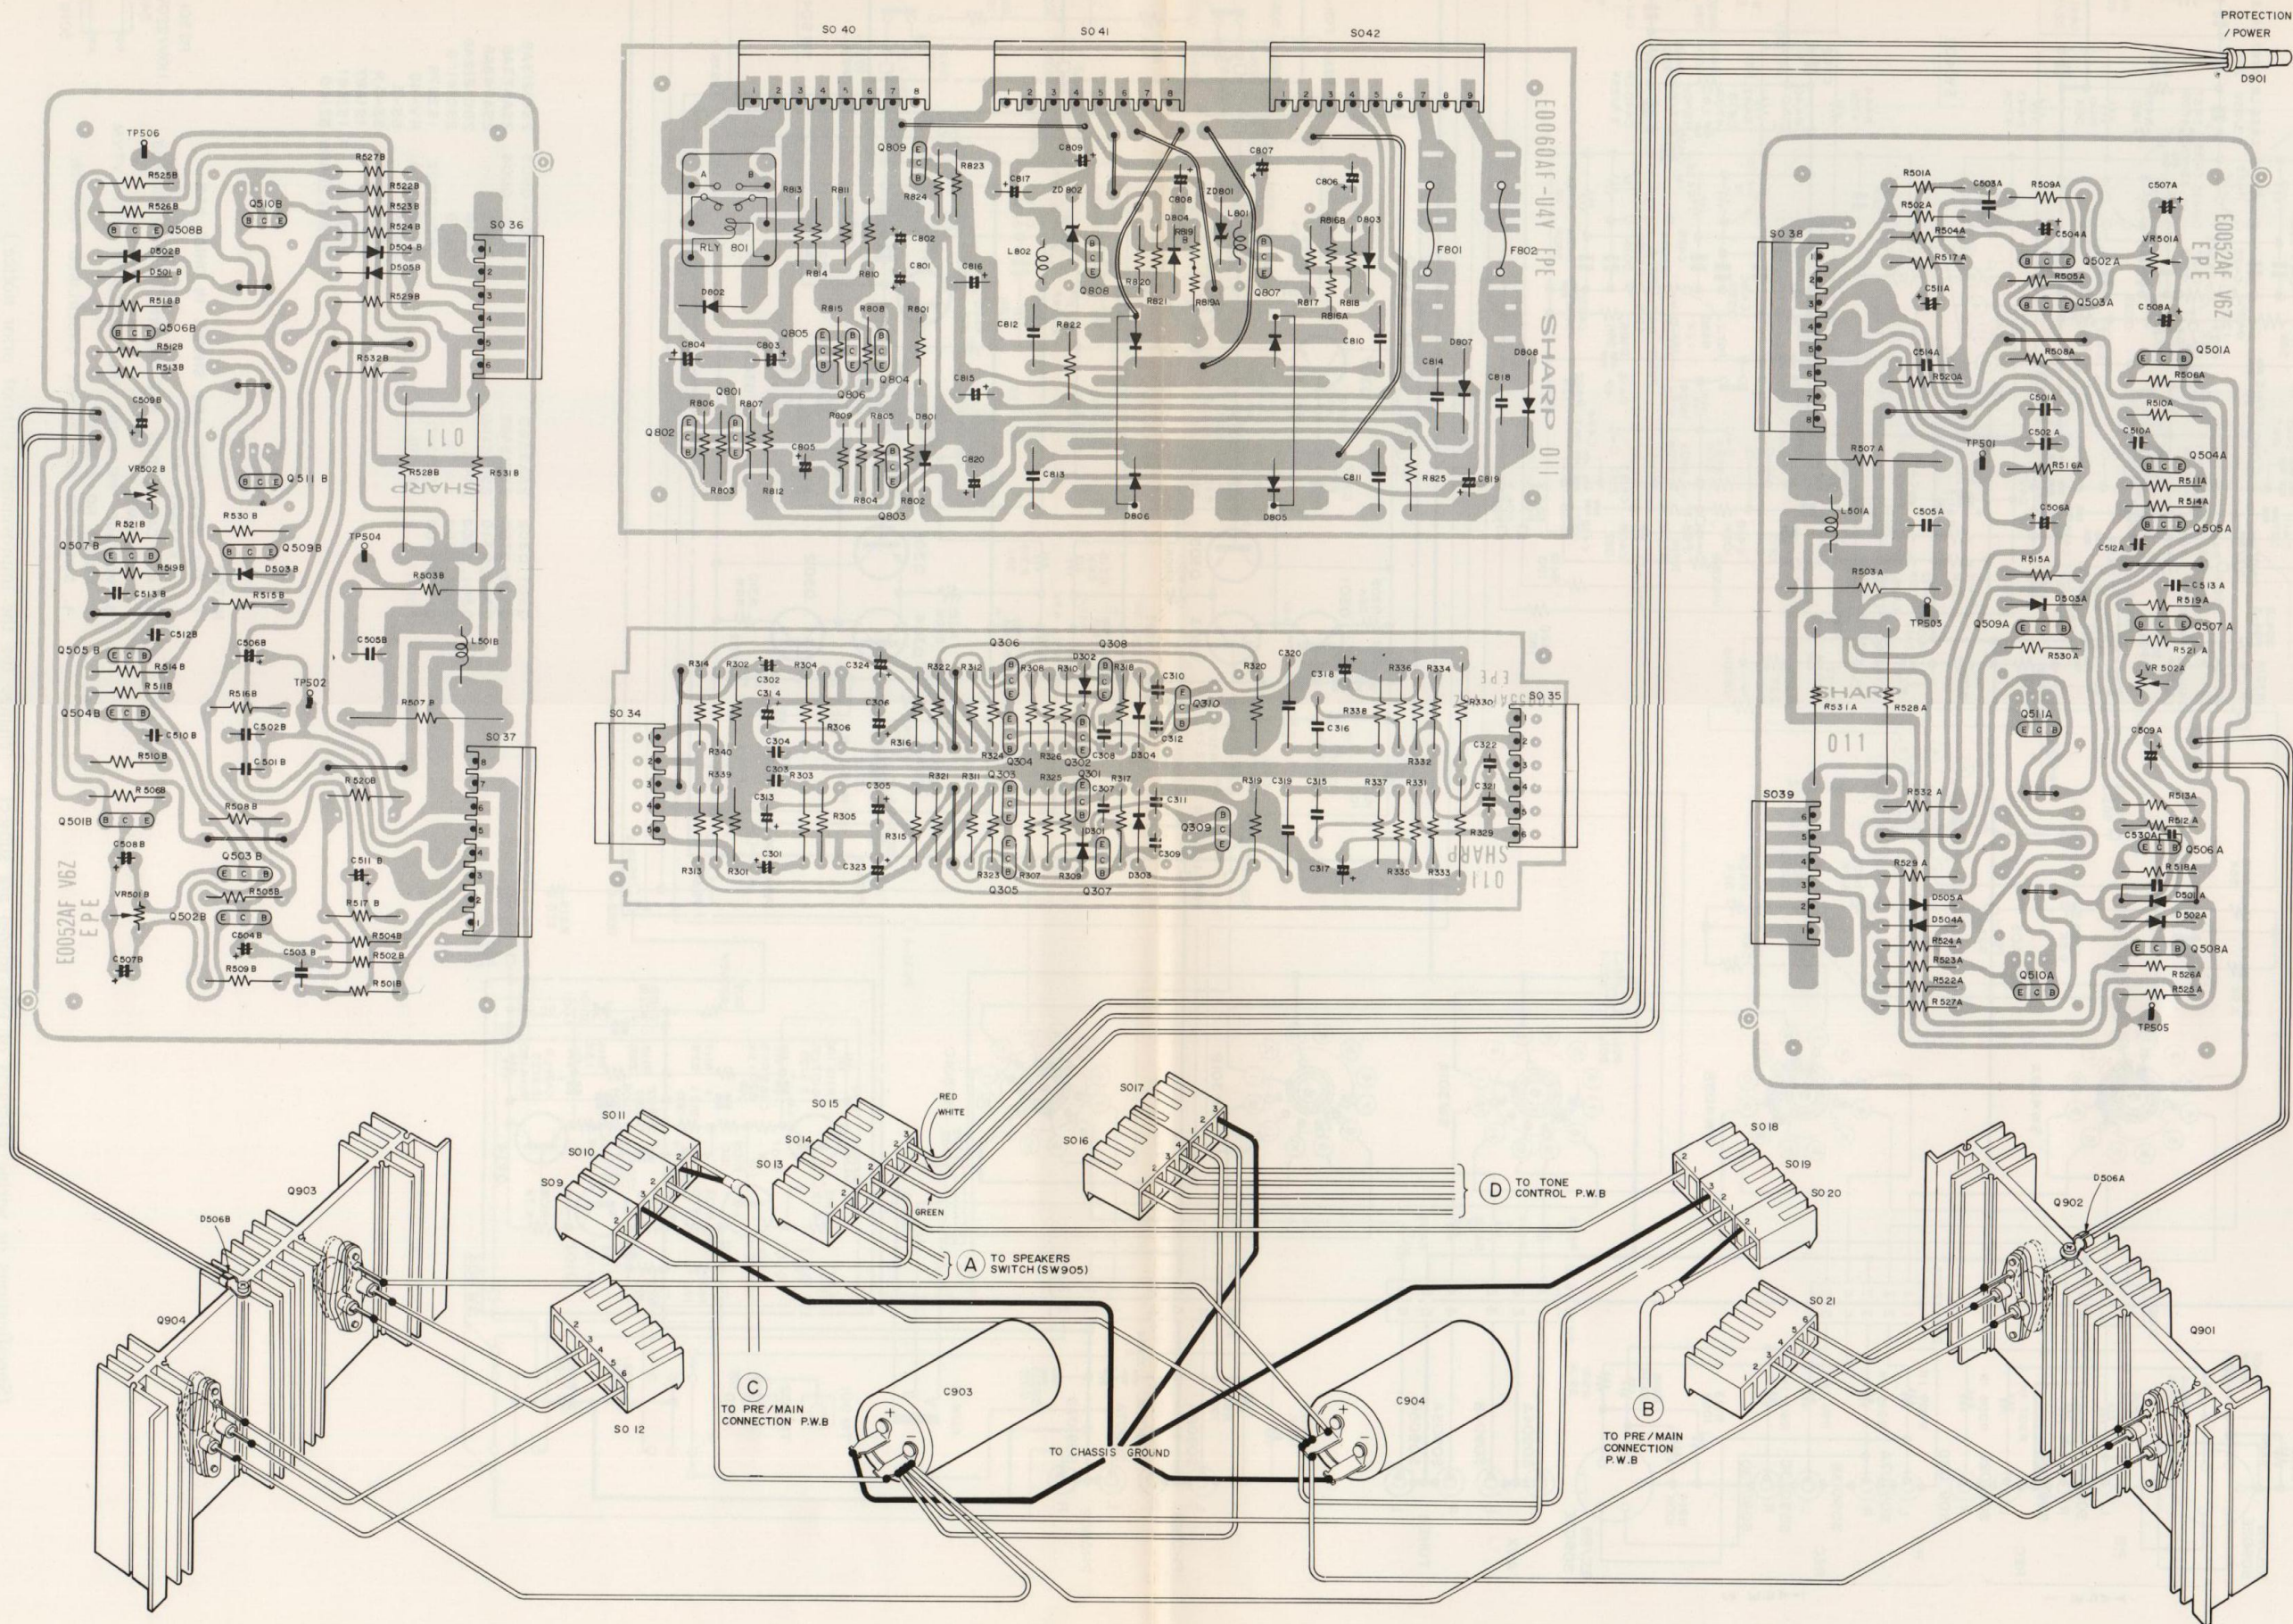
MAIN AMP./EQUALIZER AMP./AC & RLY UNIT BOARD WIRING SIDE
